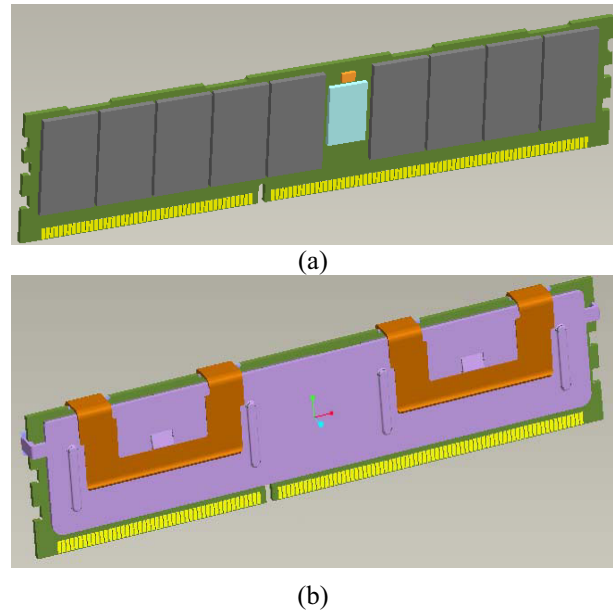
Full DIMM heat spreader (FDHS) (a) Bare module without thermal solution; (b) FDHS assembly
